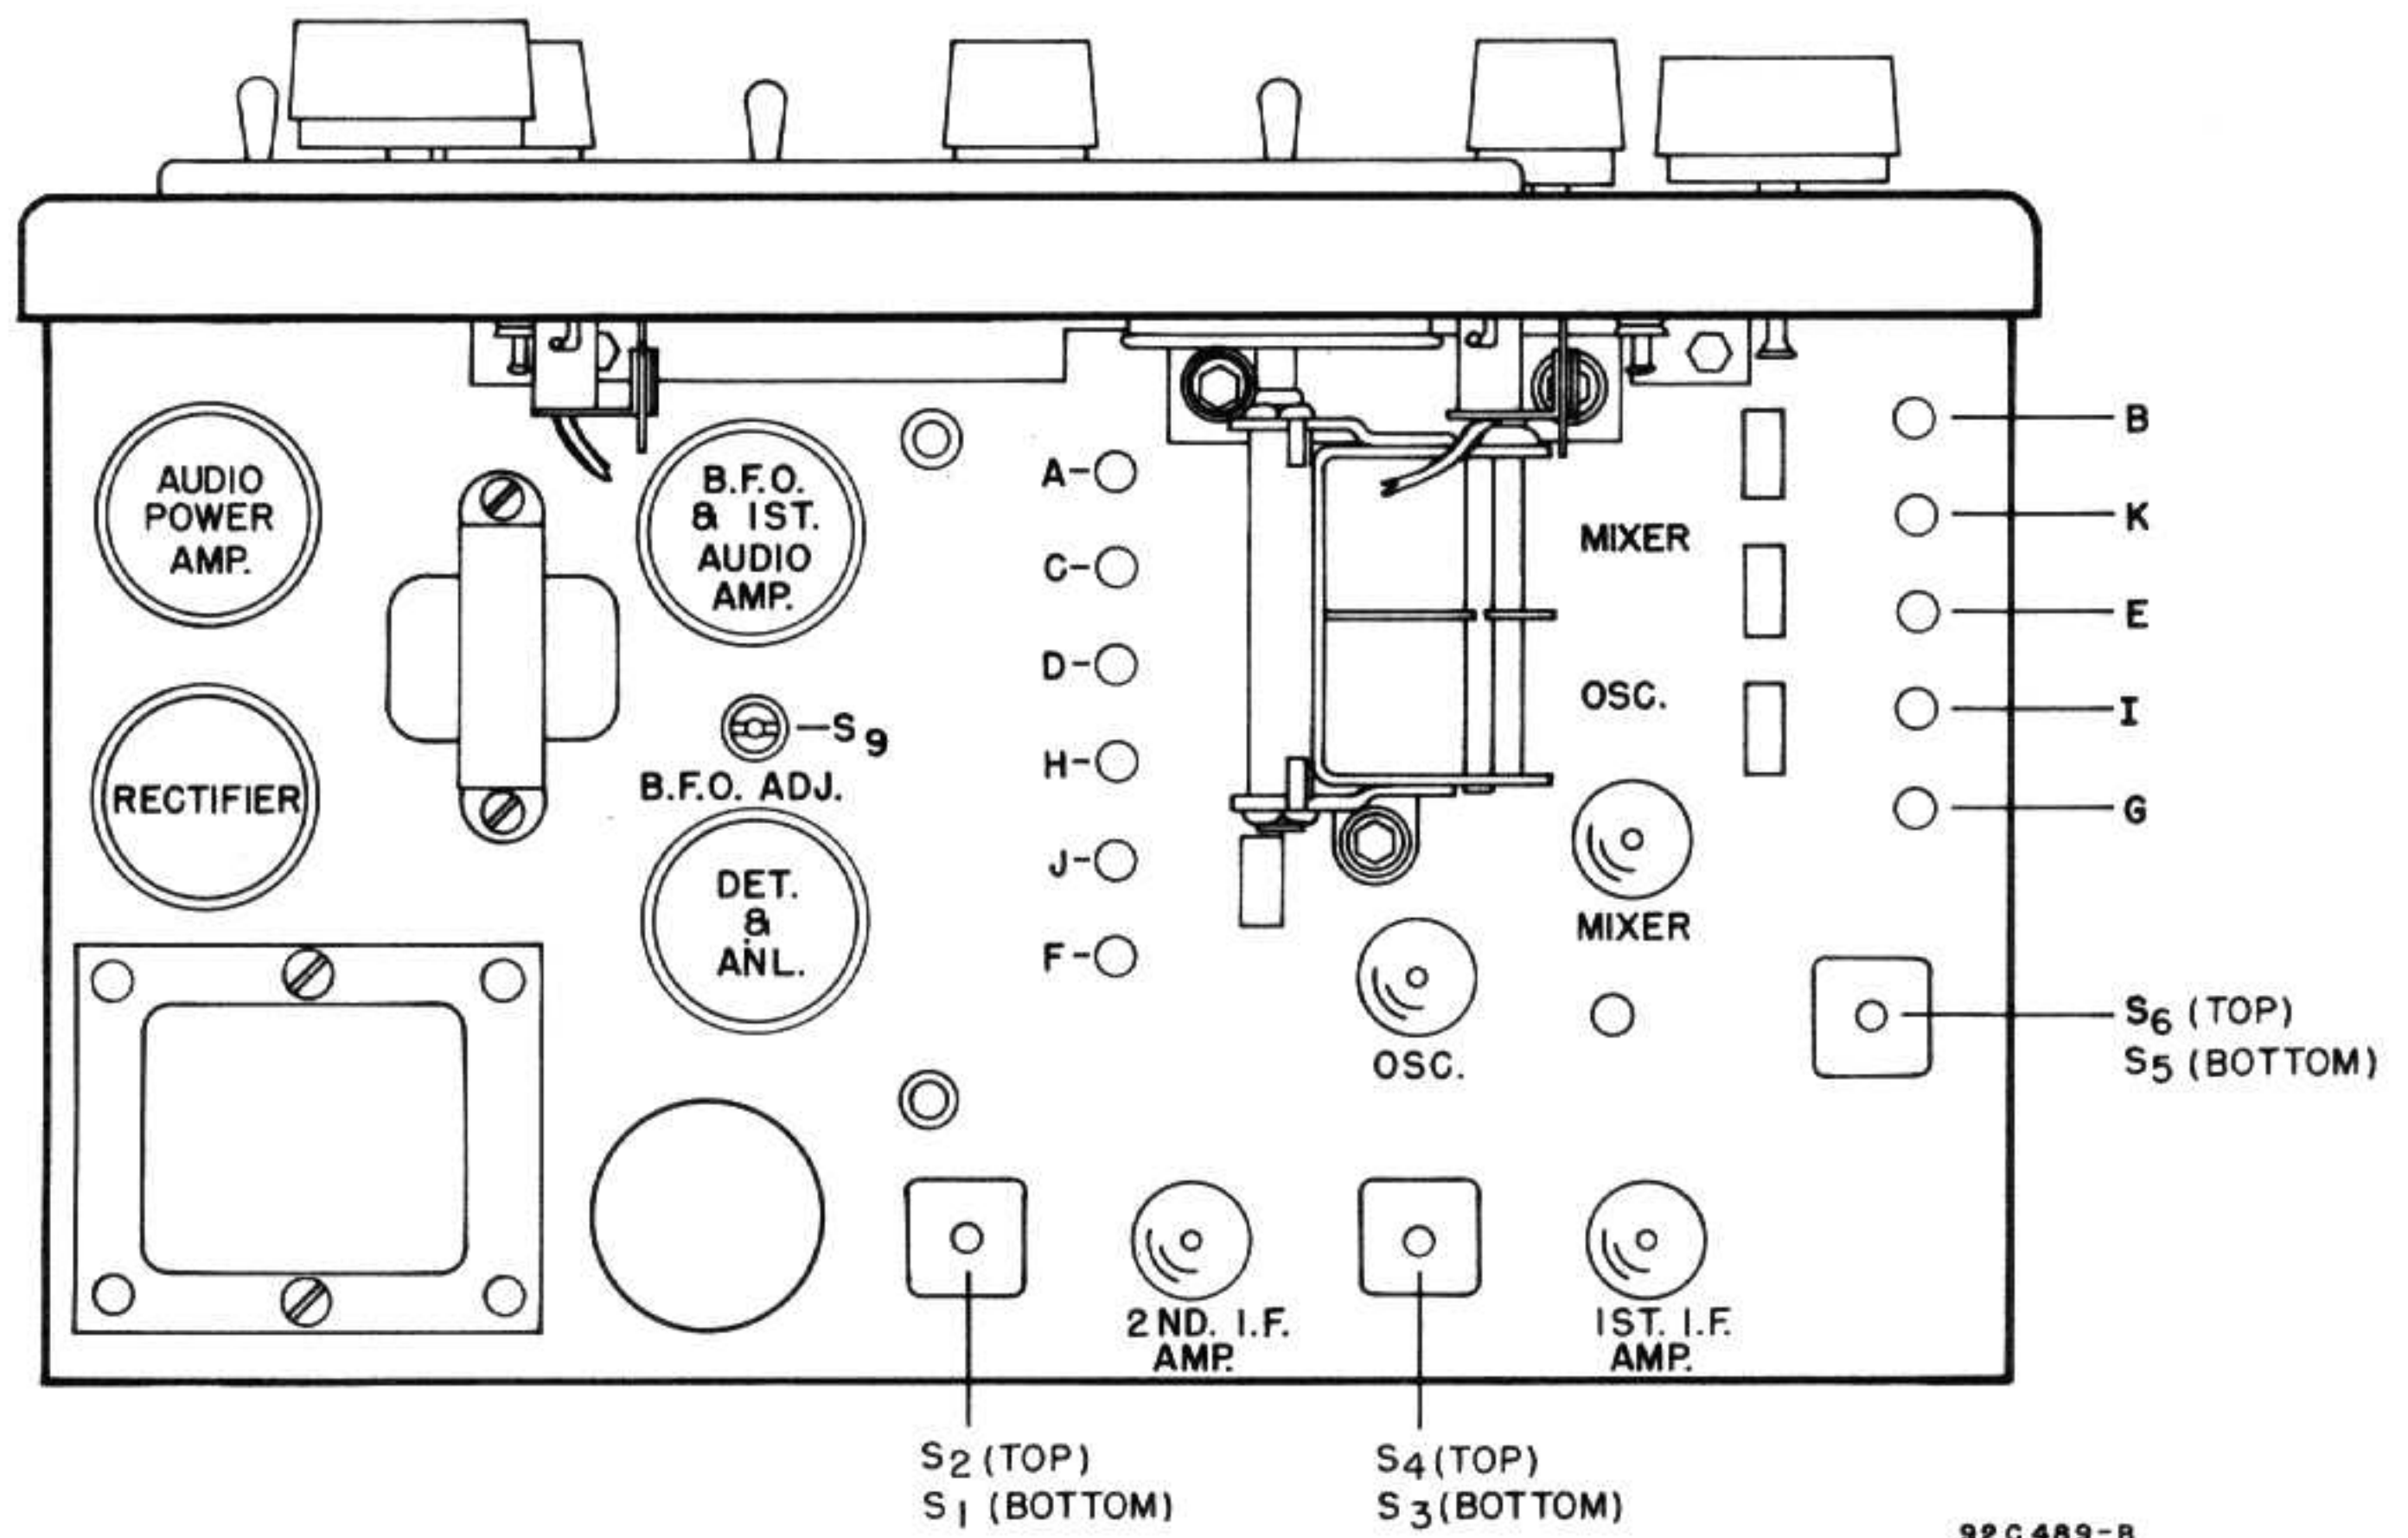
Top View of Chassis Showing Location of Alignment Adjustments
